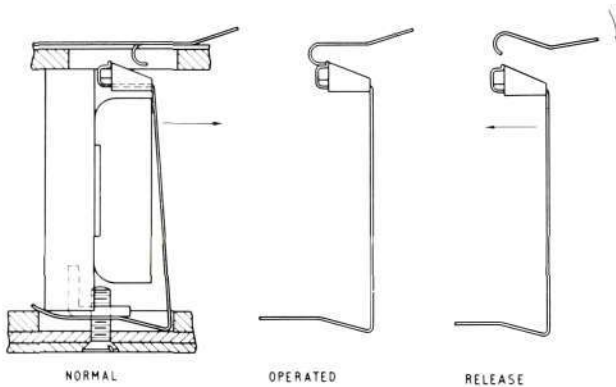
C—Exchange Line Indicator Contact and Locking Device
